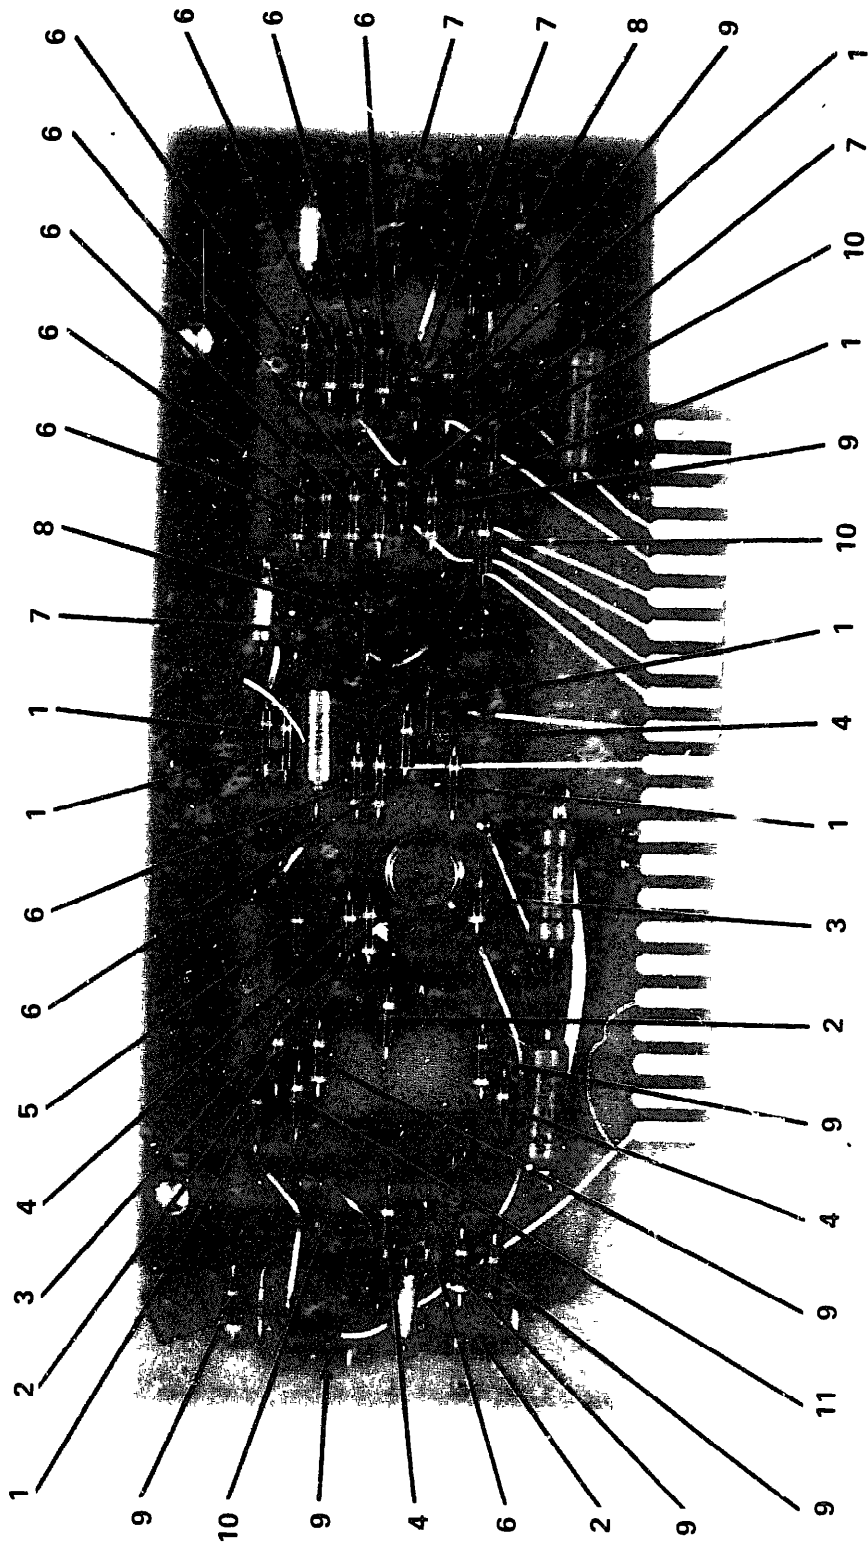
Input/Output Buffers Assembly (Sheet 1 of 2)
